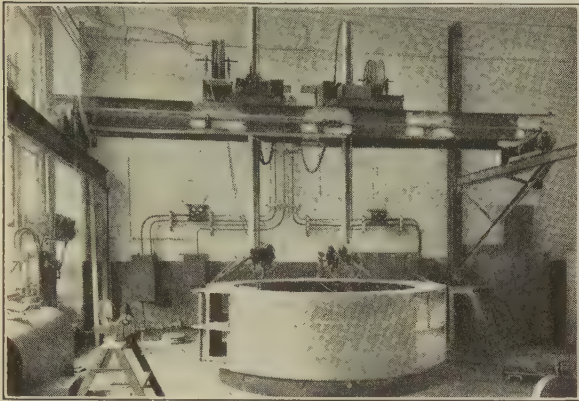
STATOR-FRAME AUTOMATIC WELDER FOR FRAMES UP TO 14 FT. DIAMETER
